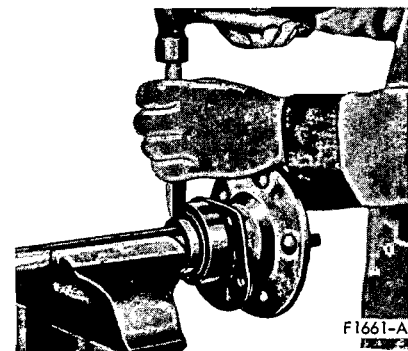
Removing Rear Wheel Bearing Retainer Ring
